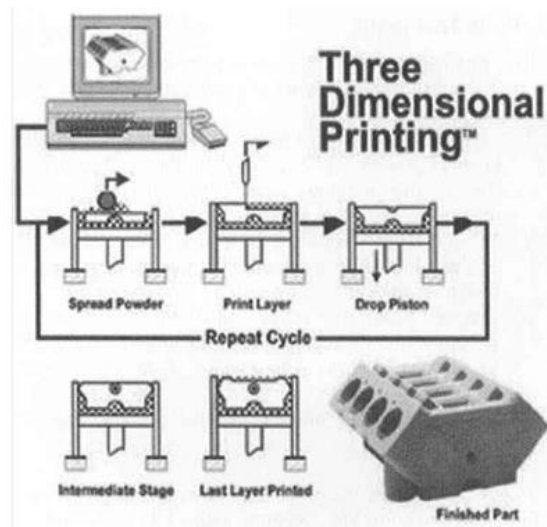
Pro Metal build sequence. Powder is spread across the build chamber. Binder is printed onto the powder in the cross section shape. The build piston is lowered and the feed piston raised. Repeat steps 1-3 until part is complete (Courtesy of Extrude Hone).
